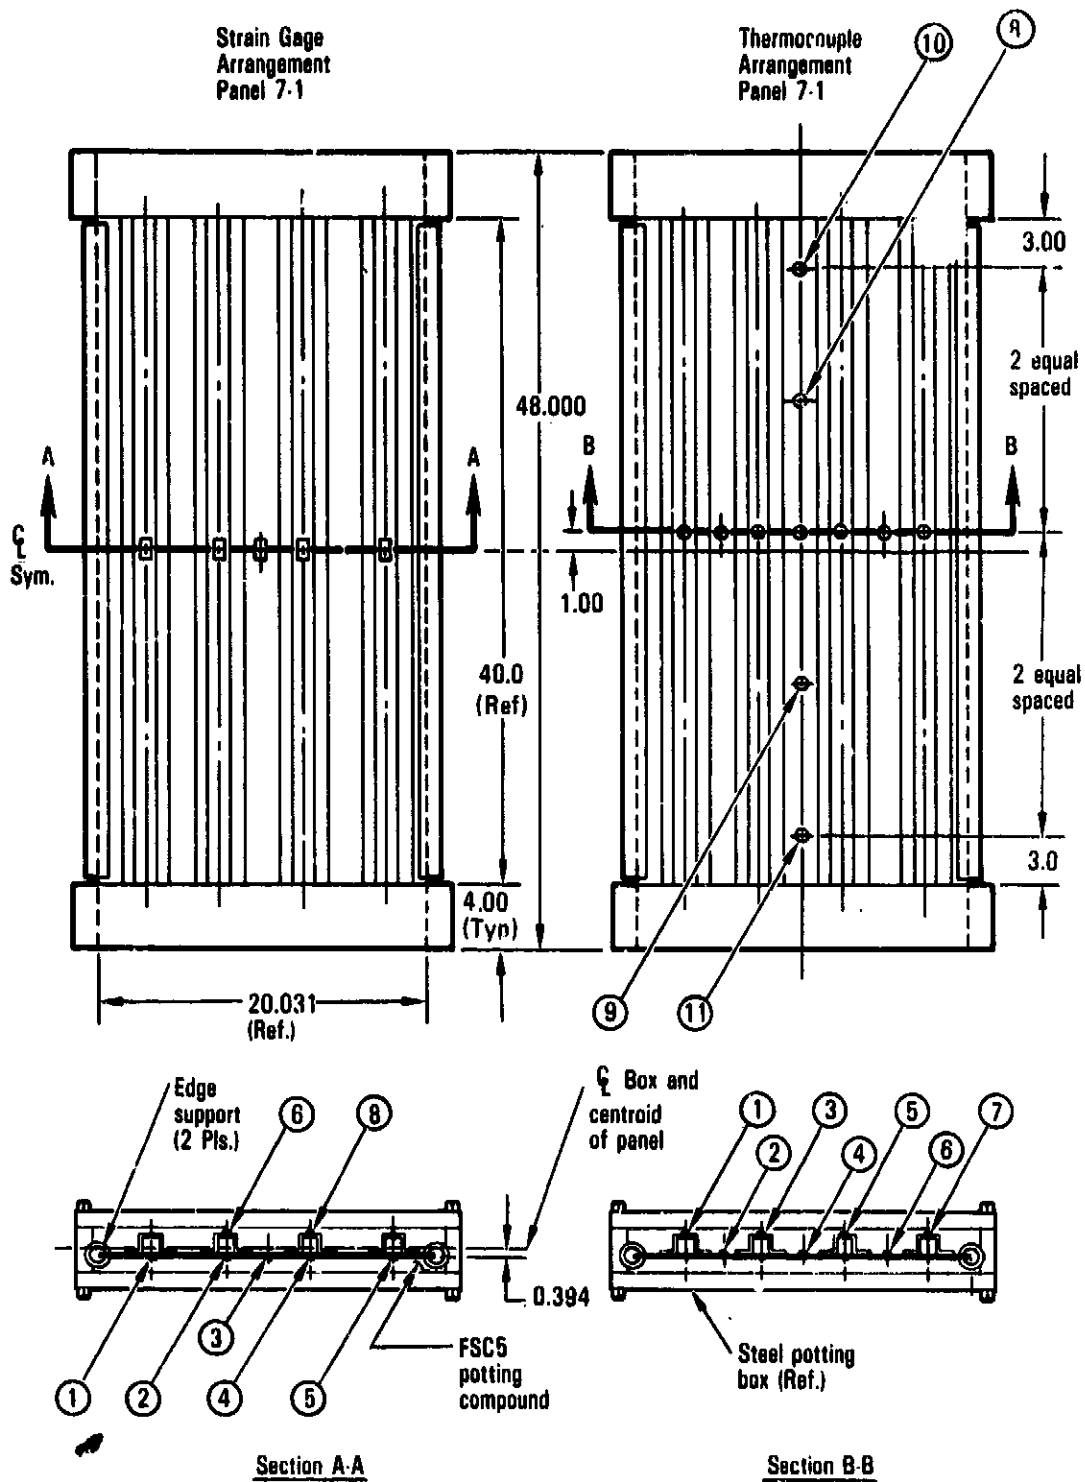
Strain gage and thermocouple arrangements, panel 7-1. Elevated temperature long column compression test of representative wing panel.
